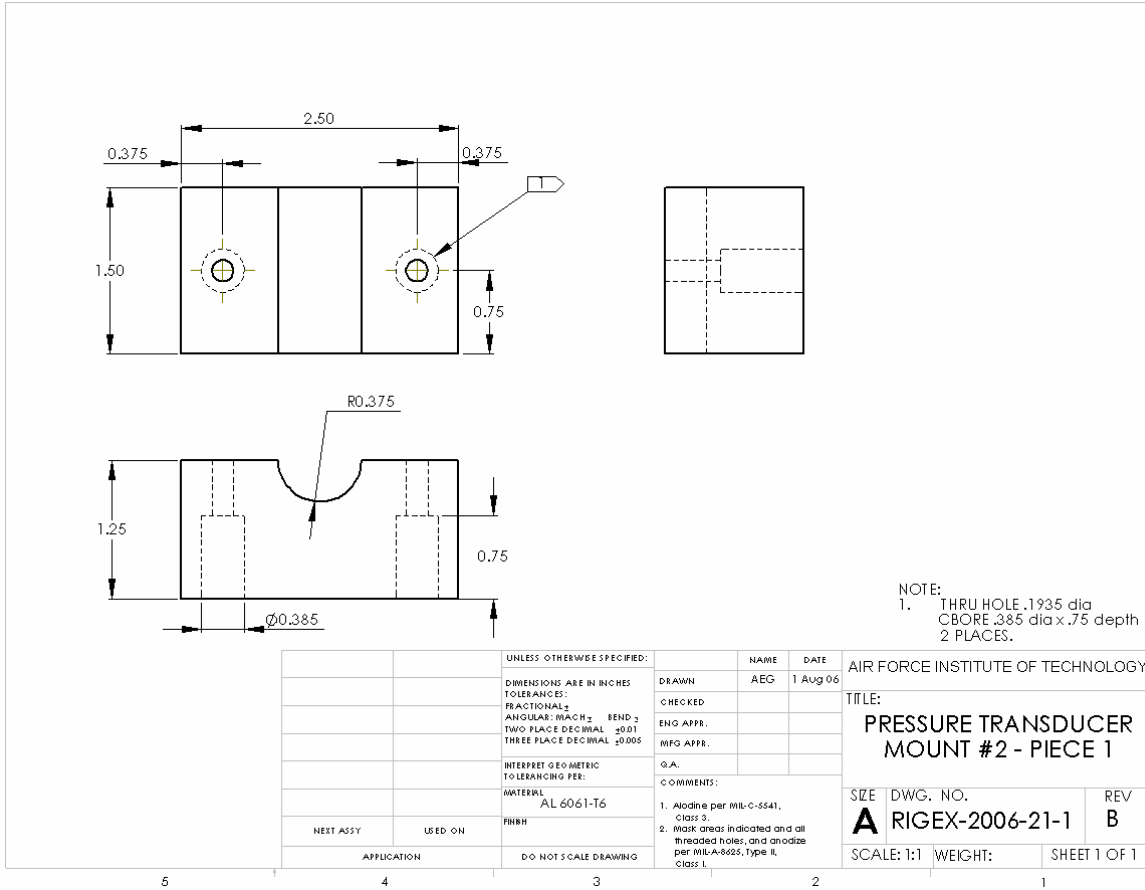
Nitrogen Tank Pressure Transducer Mounting Block Piece 1
